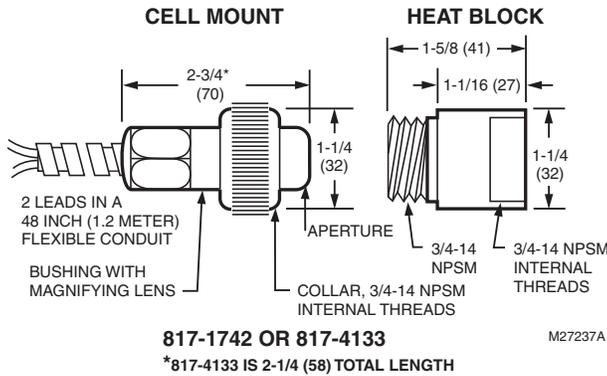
Infrared detector, mounting dimensions in inches (mm).
